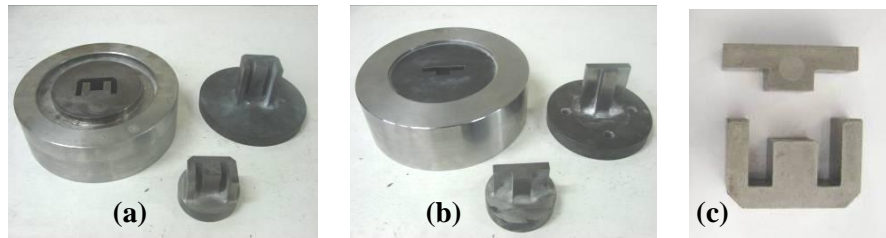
Samples in the form of transformer core – (a) Core E die – (b) Core T die – (c) Specimens
